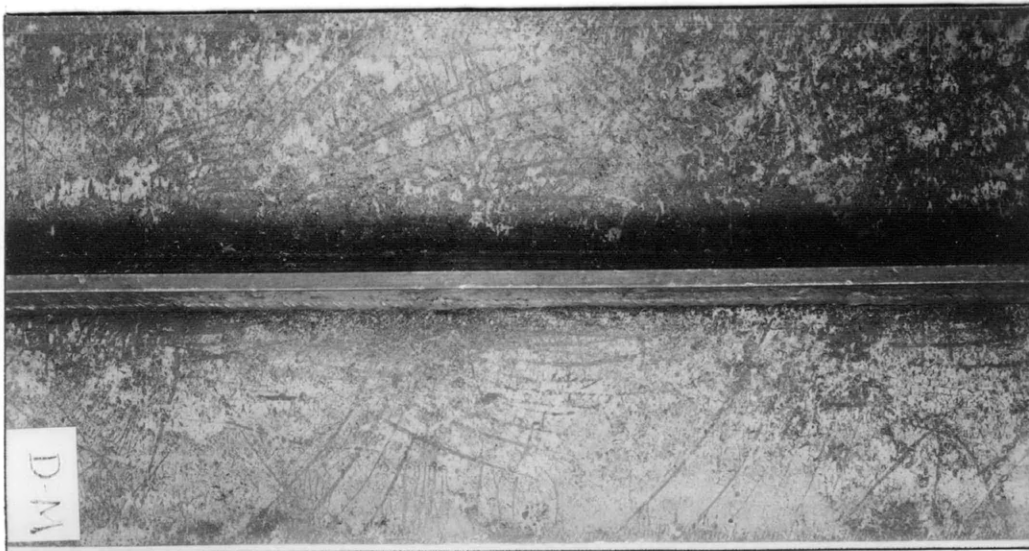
Lüders' Lines on Medium Steel Specimen D-M after Test
